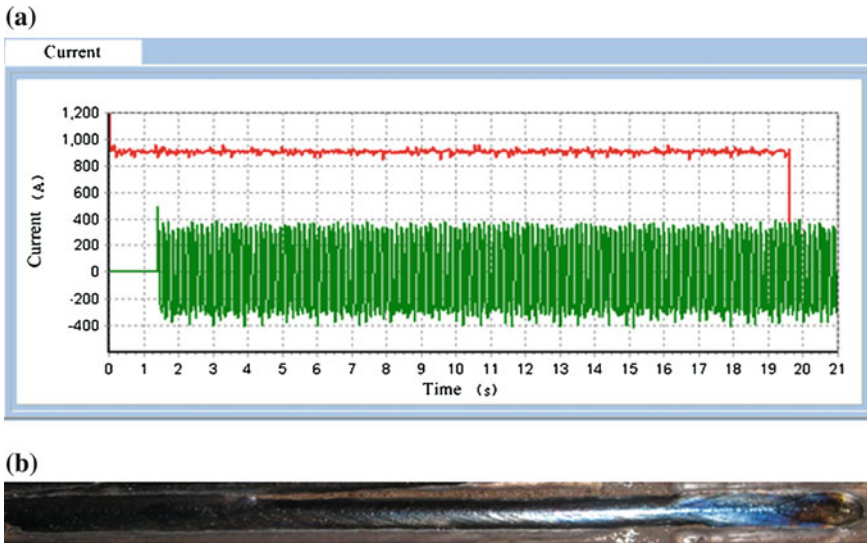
Waveform of welding current and weld seam appearance
